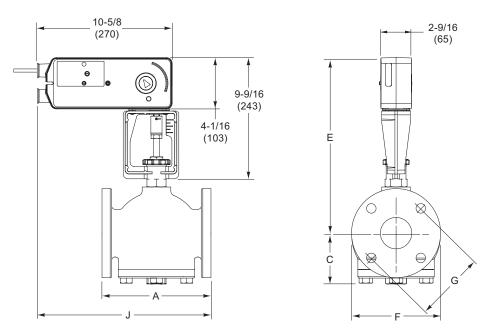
Mx61-720x with 2-1/2" to 4" N.C. 2-Way Flanged Globe Valve.
